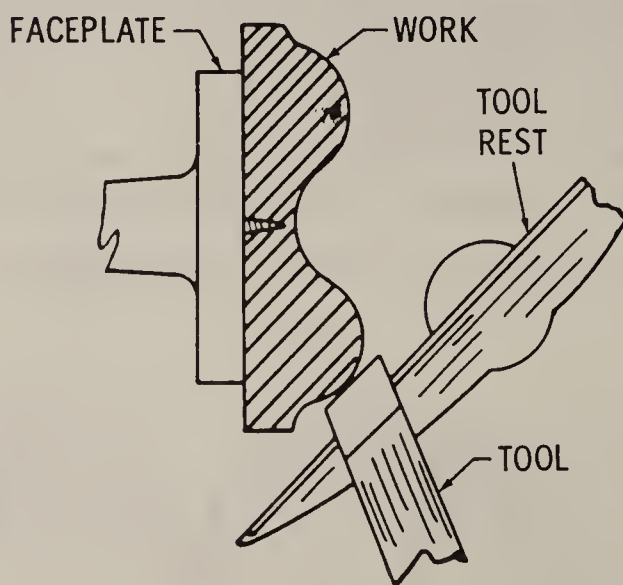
Position of tool when taking a convex scraping cut with the small skew chisel.
